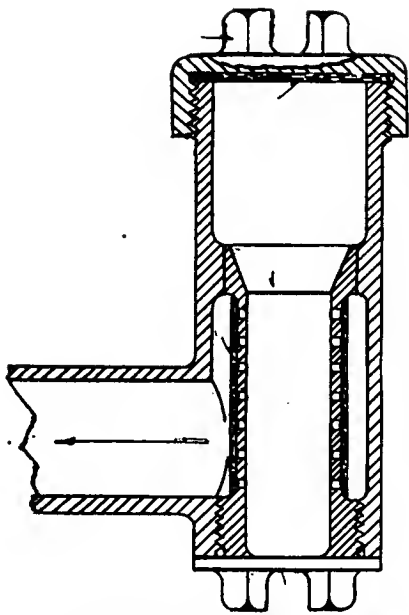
Manner of locating filter in gasoline filler vent on the fuel tank.
